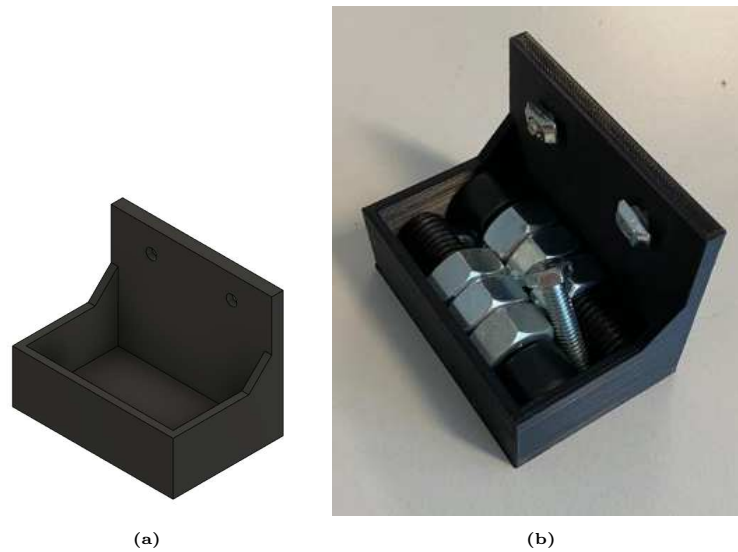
(a) CAD model of the 3D printed Y case and (b) filled case.
